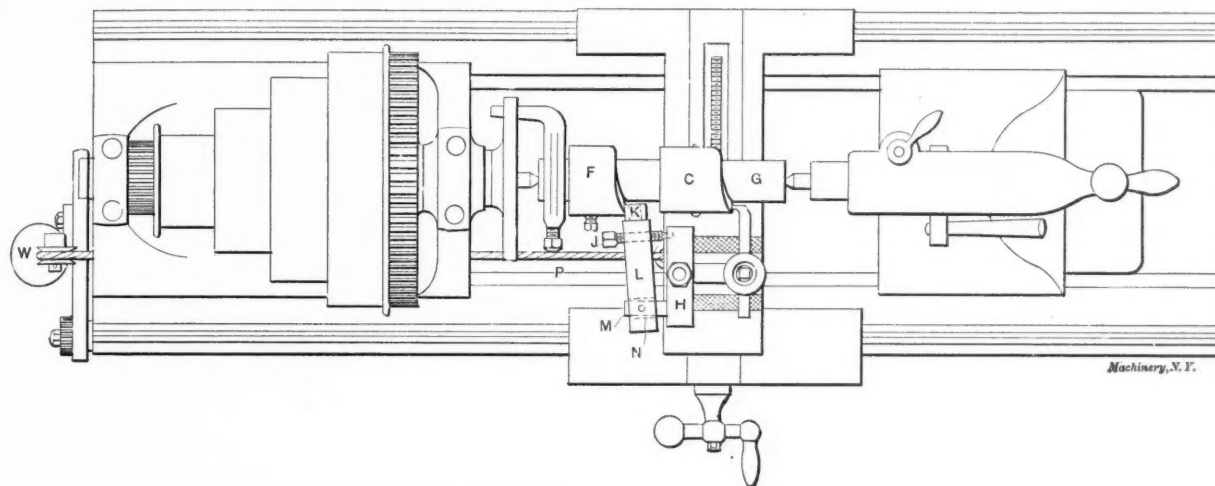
Lathe "Set-up" for Making Formed Cutters.
